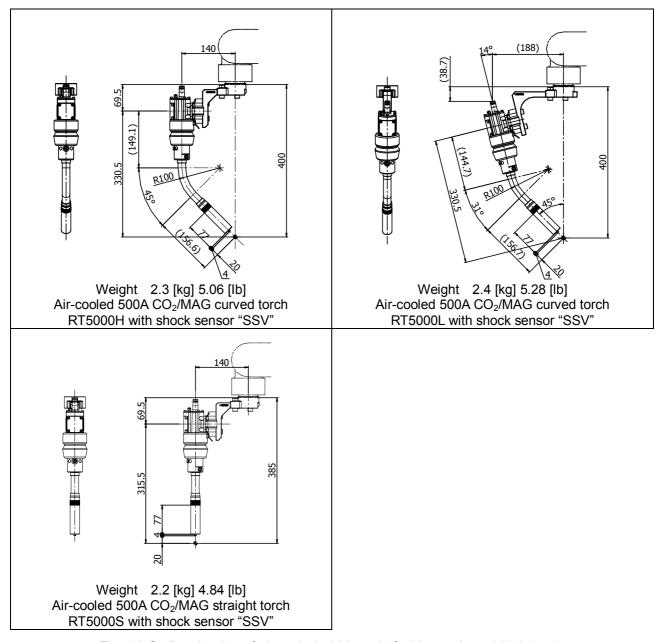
Outline drawing of air-cooled 500A torch (for V type, A type) Unit (mm)
